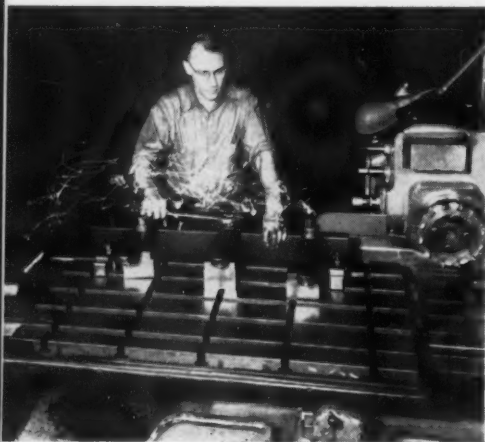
Motion study: loading and clamping a part with the aid of bolts and straps.
